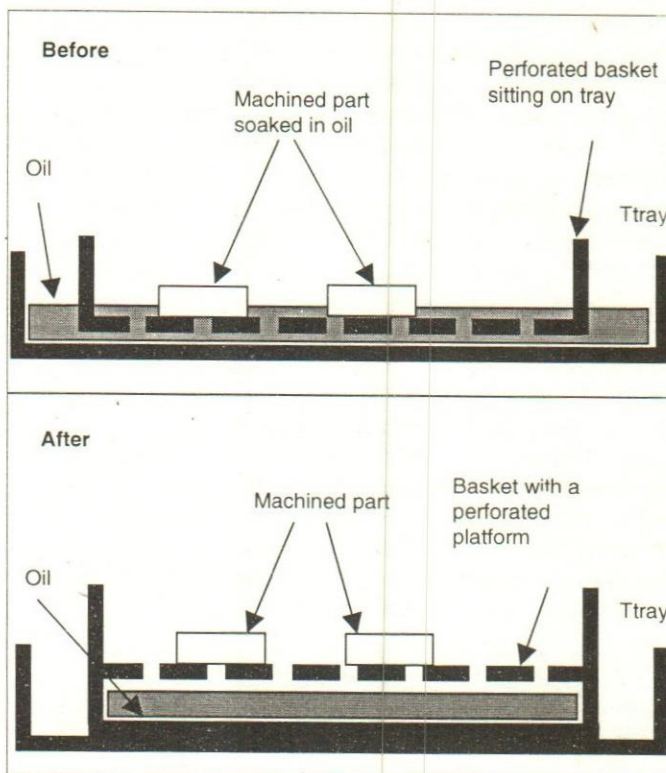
Improved basket design to allow oil to drip from machined parts.
